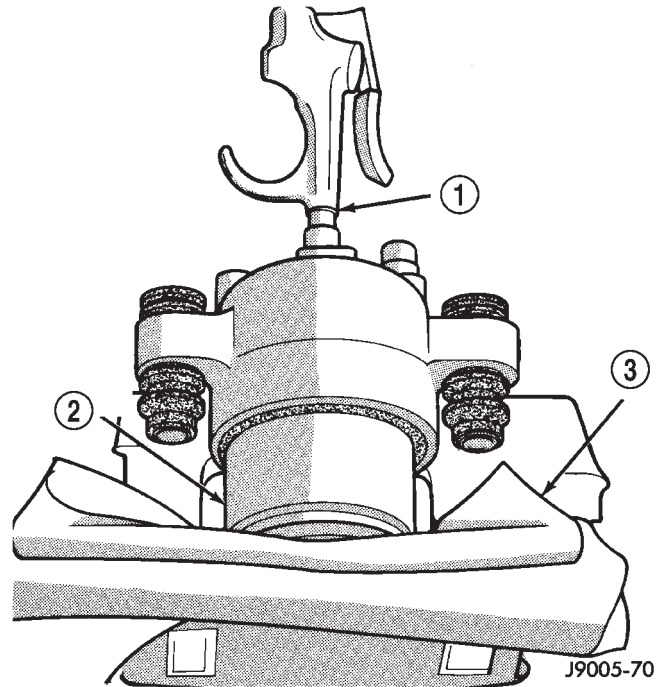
CALIPER PISTON REMOVAL - TYPICAL
